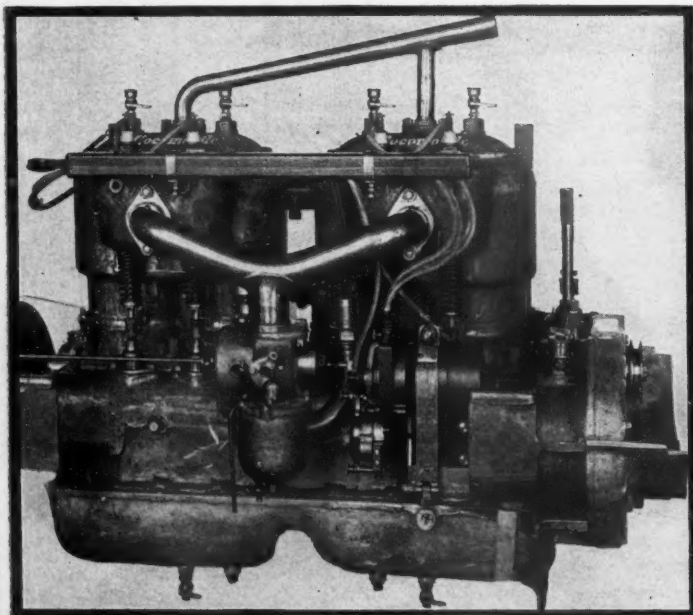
LOCOMOBILE FOUR-CYLINDER MOTOR FOR 1911
